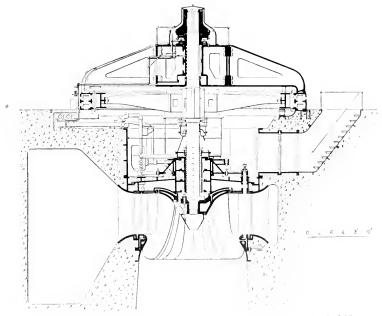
Cross Section of Generator and Hydraulic Turbine. Thrust Bearing Located at Toplef Seat
